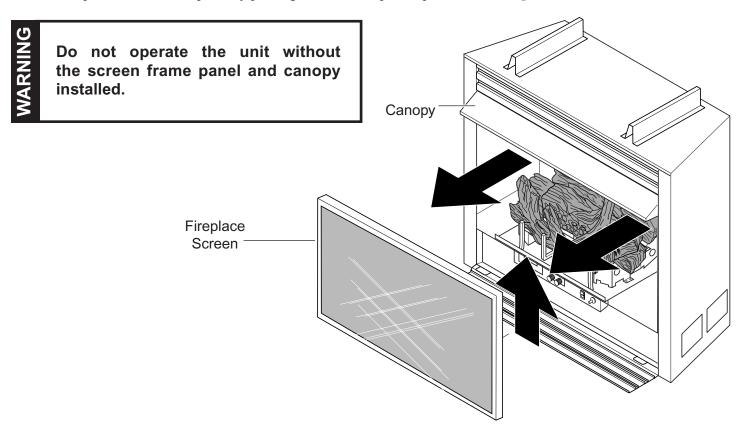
Removing Fireplace Screen Frame Panel NOTE: Fireplace screen must be removed to access log box and to install canopy.
